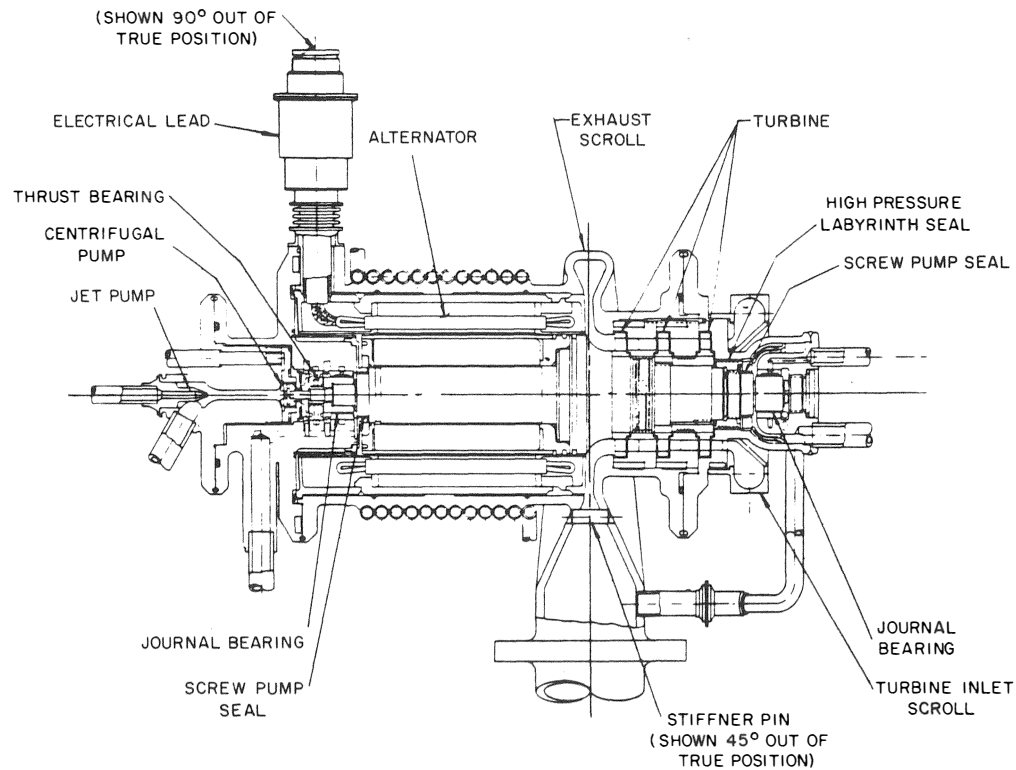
Turboalternator Using Mercury Lubricated Bearings. (developed by TRW, Inc.)
